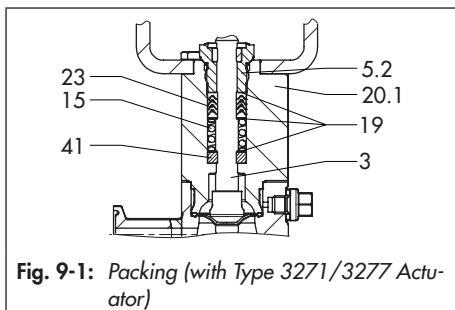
Packing (with Type 3271/3277 Actuator)
